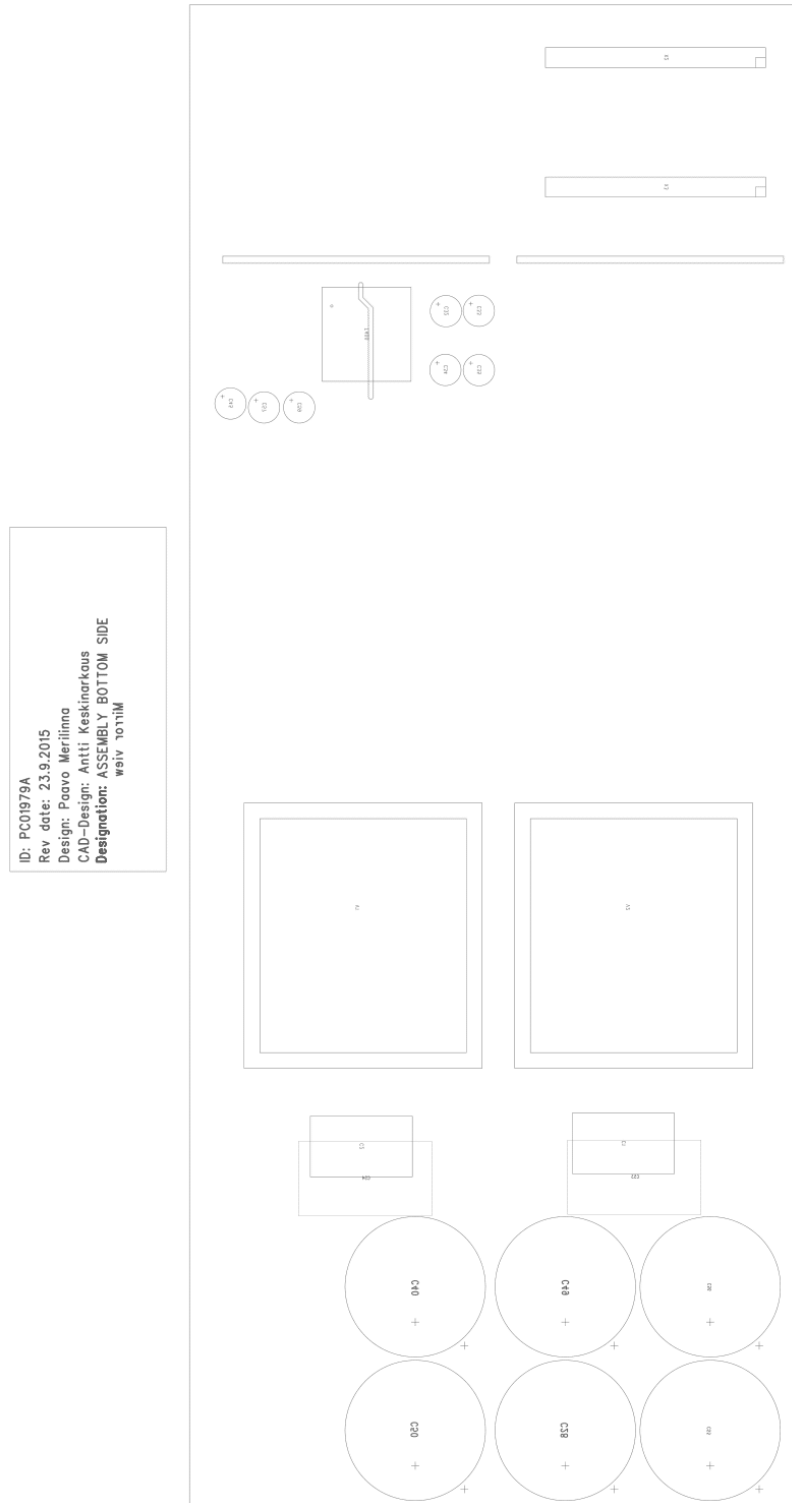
Bottom-side assembly image of the studied prototyping board (70CPE1979A)
